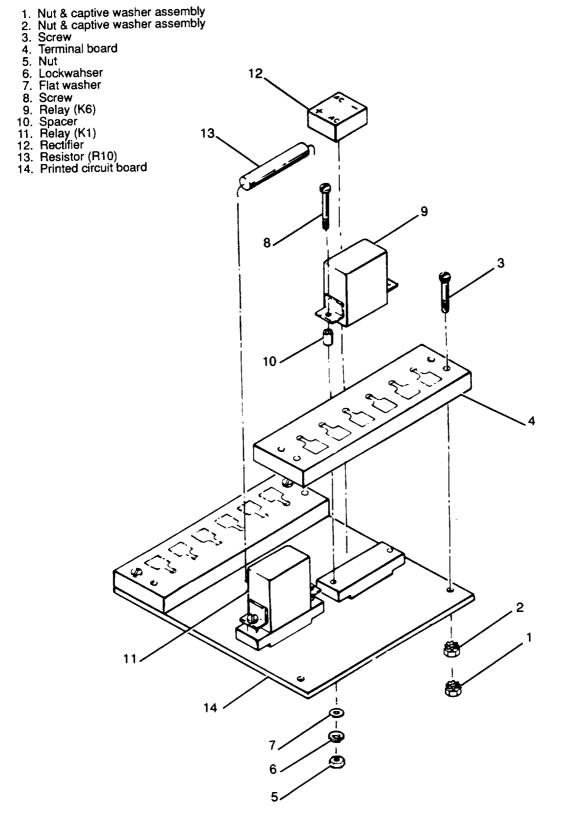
Control Cubicle Relay Assembly, Exploded View
